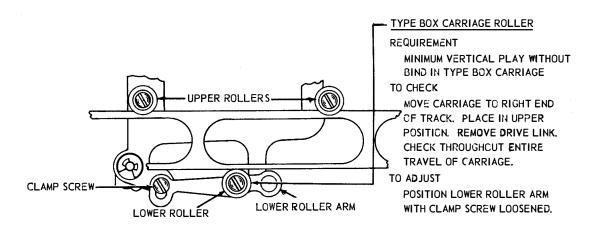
TYPING UNIT, PRINTING AND TYPE BOX CARRIAGE
